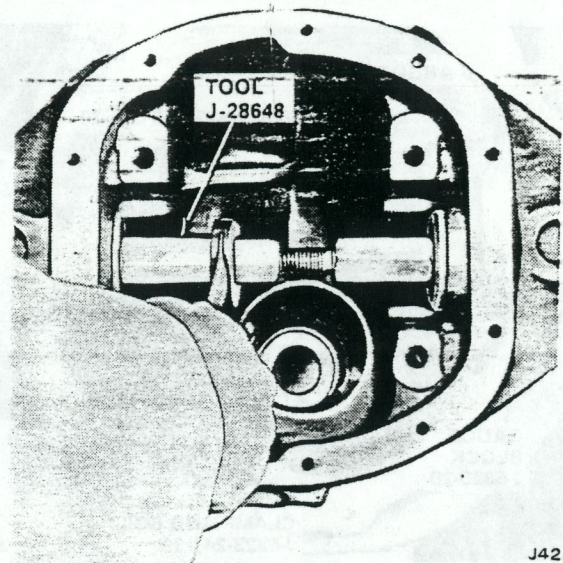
F-58 Front Axle Housing Inner Oil Seal Installation
